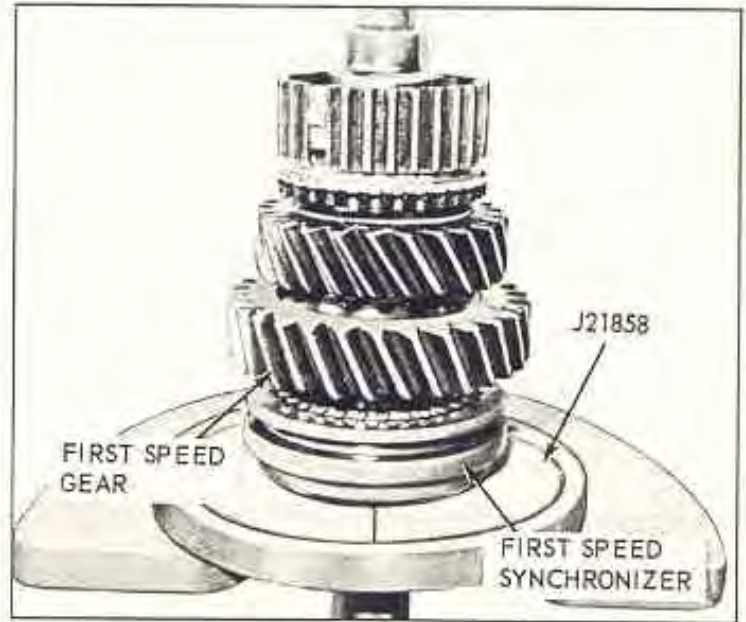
B-23 Installing First Speed Gear and Synchronizer
